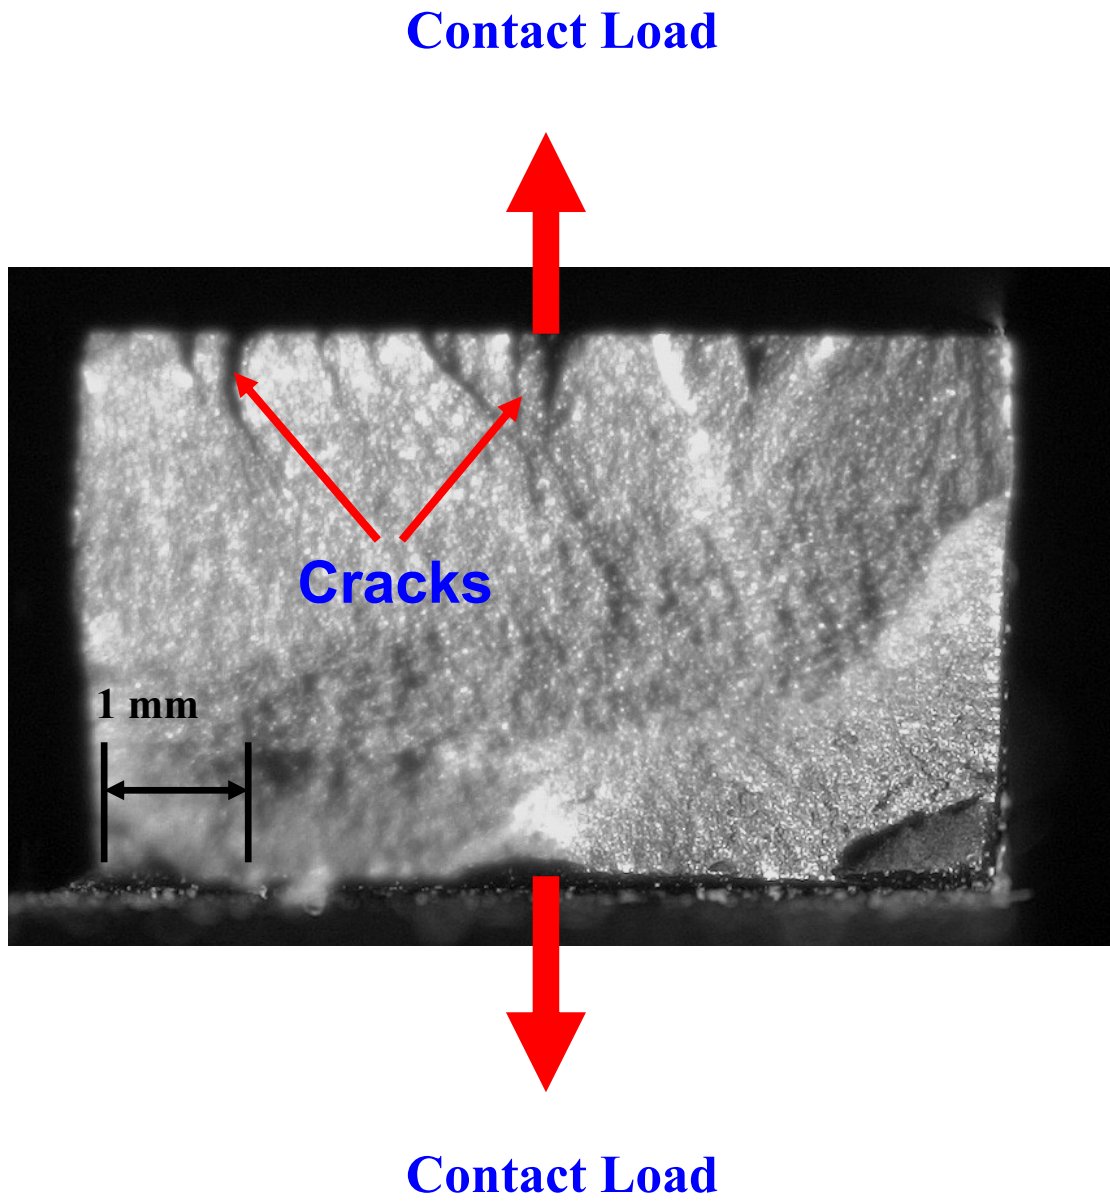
Fracture Surface of Failed Specimen for Test # 7
